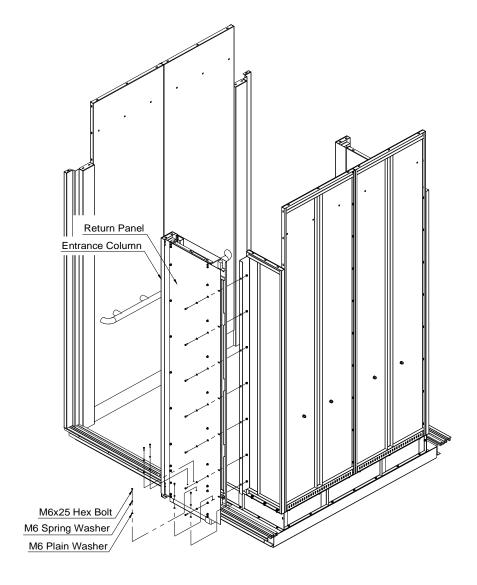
D. RETURN PANEL ASSEMBLY (FRONT and REAR ENTRANCE)
